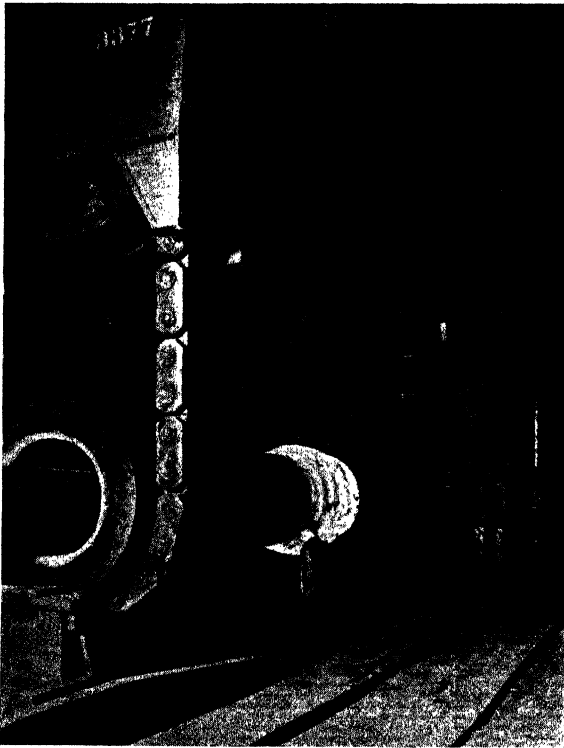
7000-ton Electro-Hydraulic Forging Press
